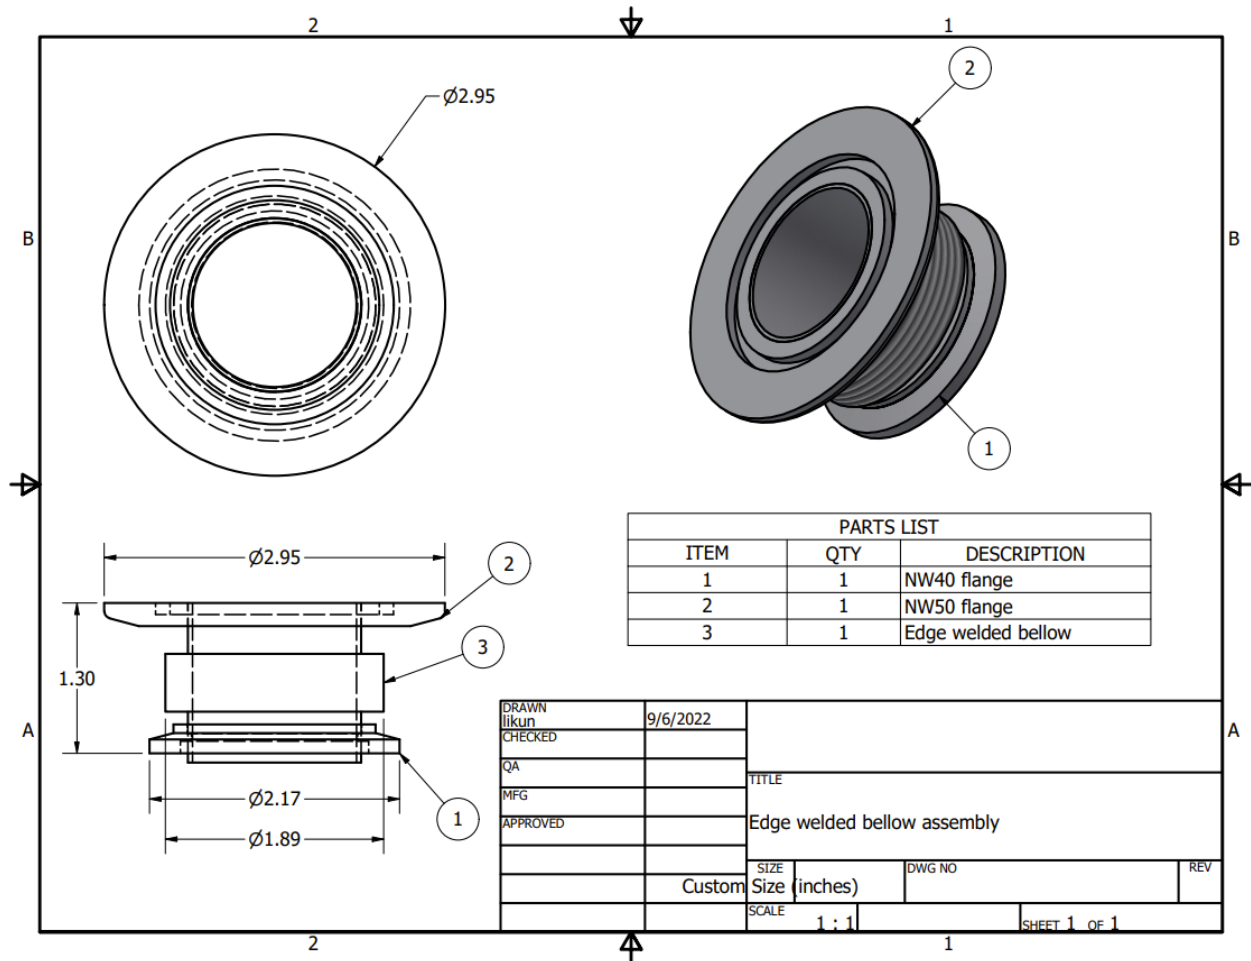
Drawing of the edge welded bellow coupler. An edge welded bellow was welded with NW40 and NW50 KF flanges to connect the THz box with the STM chamber viewport. The NW40 flange is clamped to the THz box, and the NW50 flange is clamped to the viewport flange.
